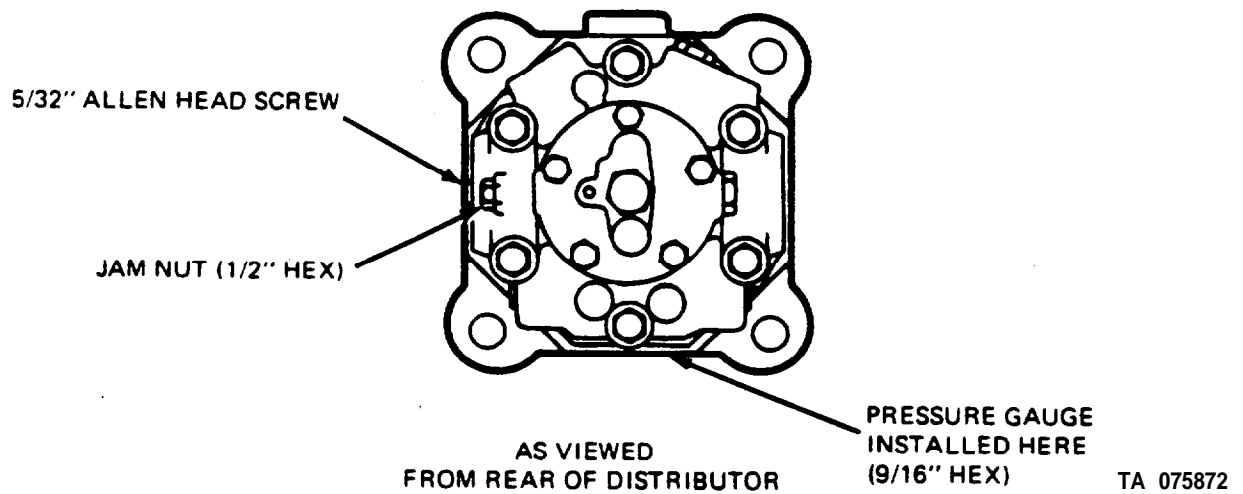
Hydraulic Motor Pressure Adjustment.
